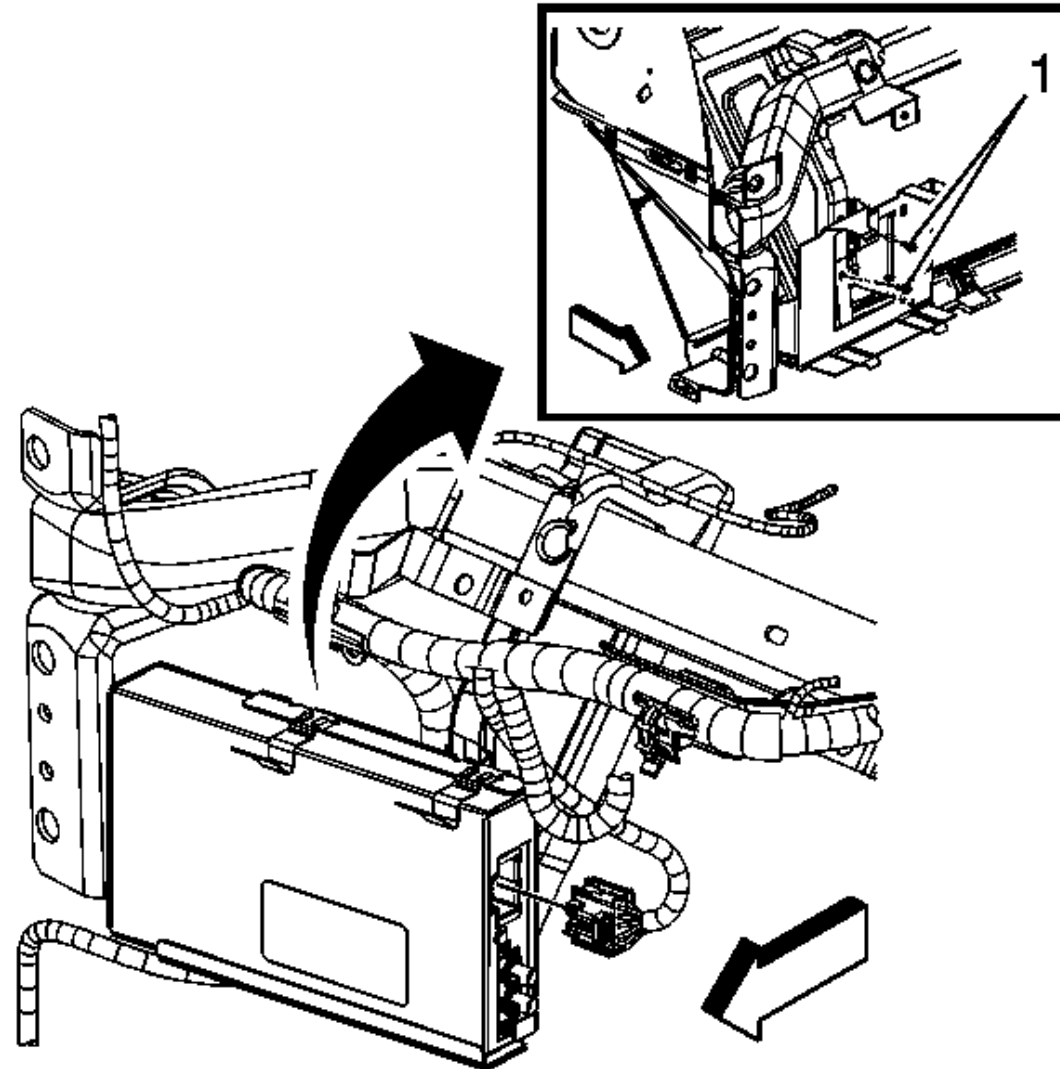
View Of Digital Radio Receiver & Wire Connector
